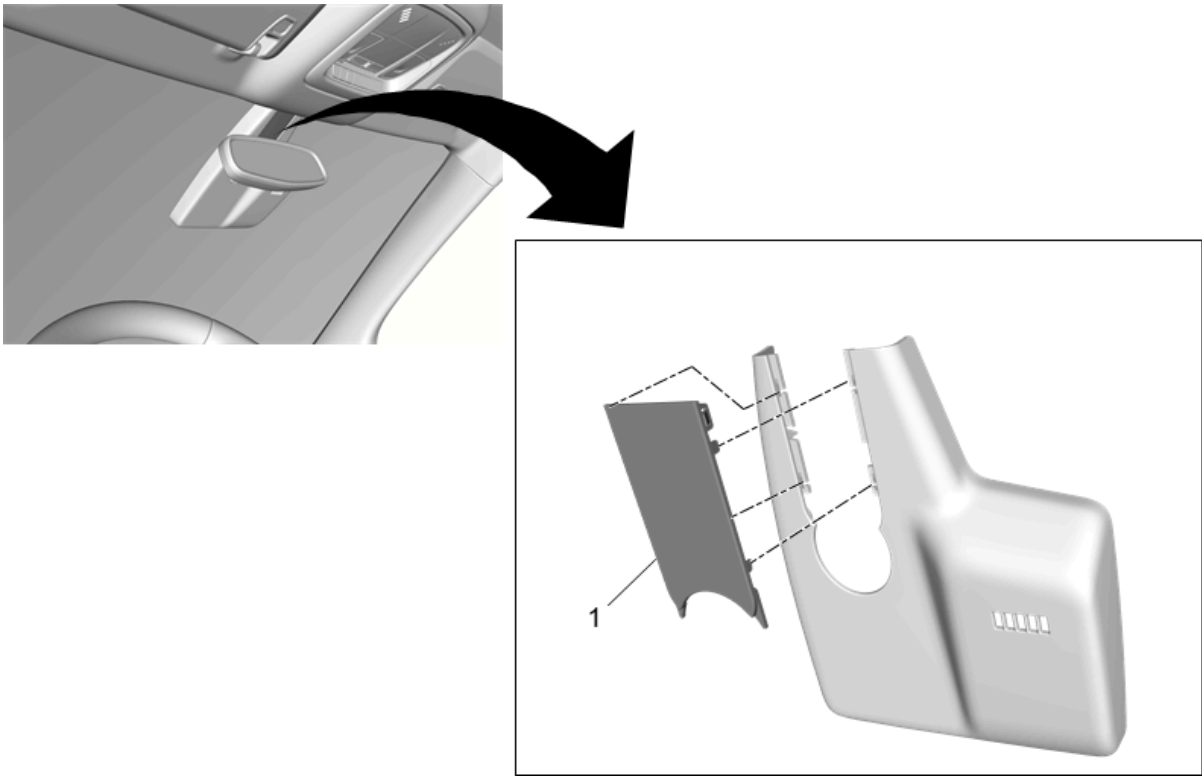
Windshield Multifunction Sensor Mount Bracket Cover
